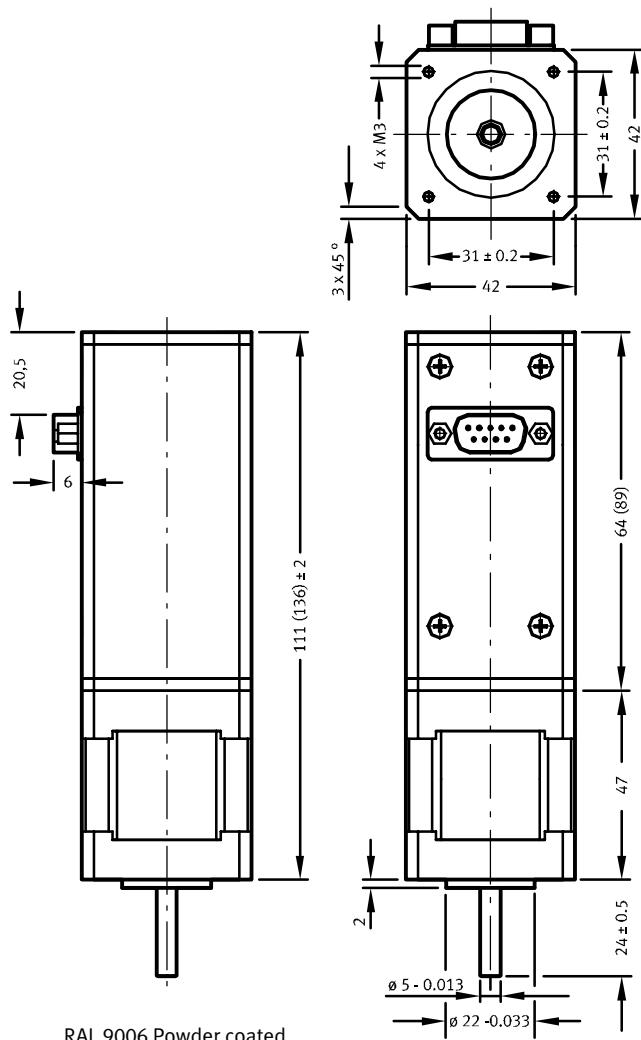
Dimensions in () for MTRE-....-AB (with brake)
